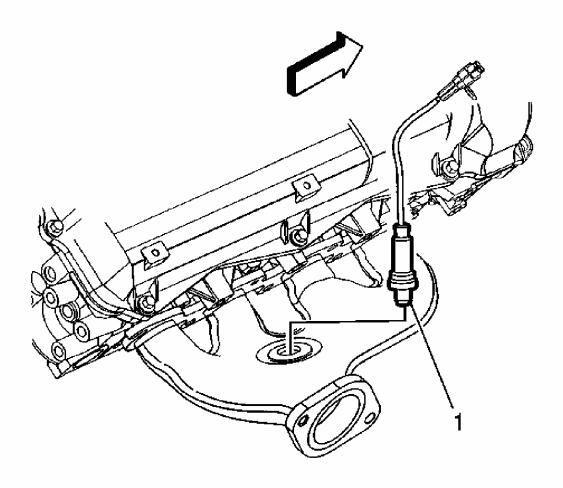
View of Oxygen Sensor Courtesy of GENERAL MOTORS CORP.
